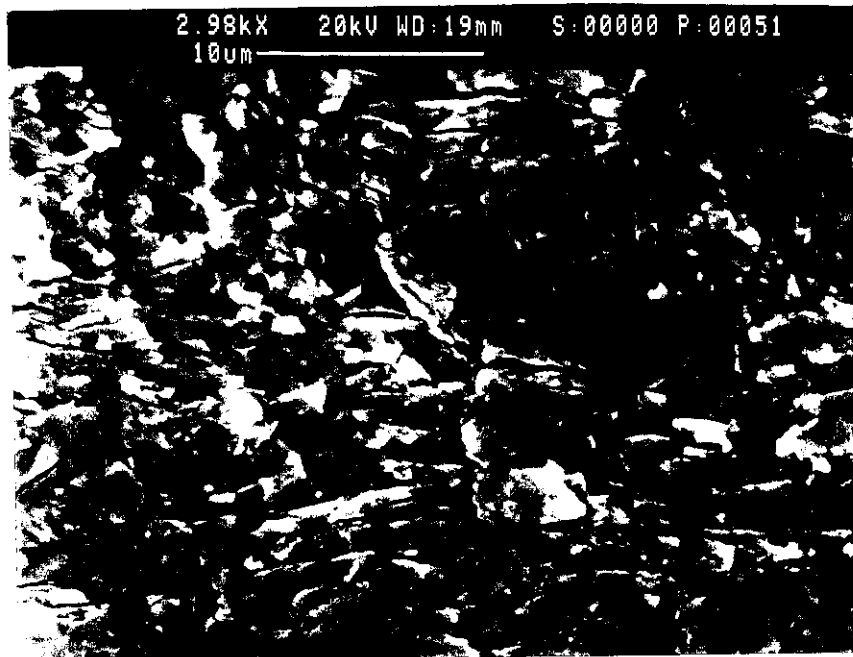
Typical appearance of fatigue fracture in zone 2
